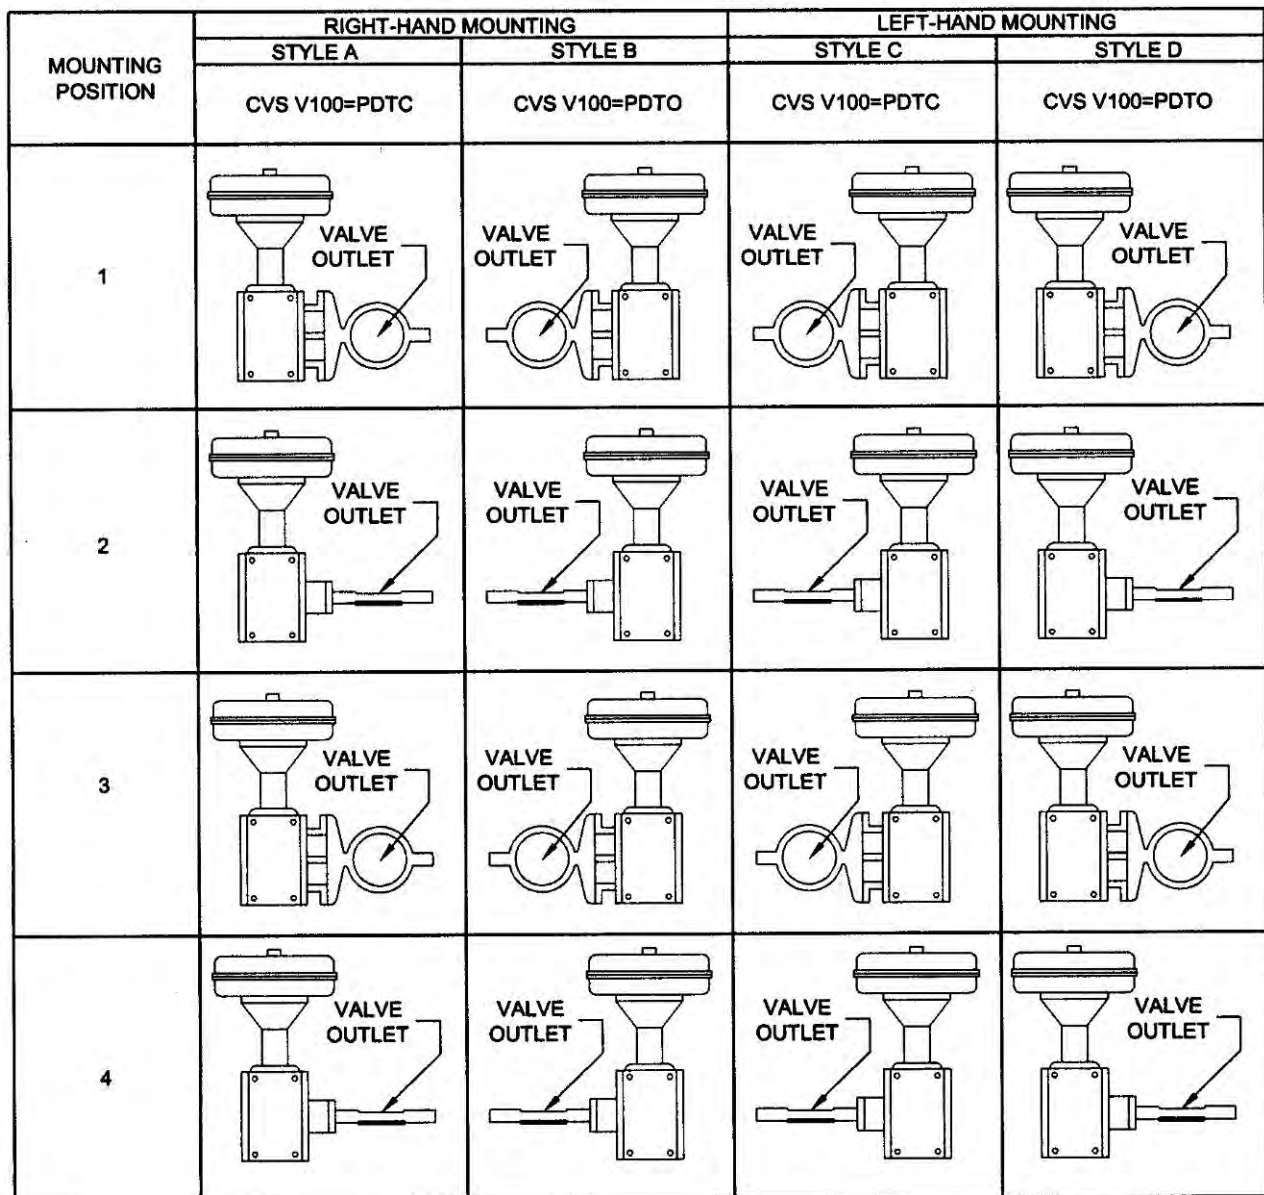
CVS Type 1051 Actuator-Valve Mounting
